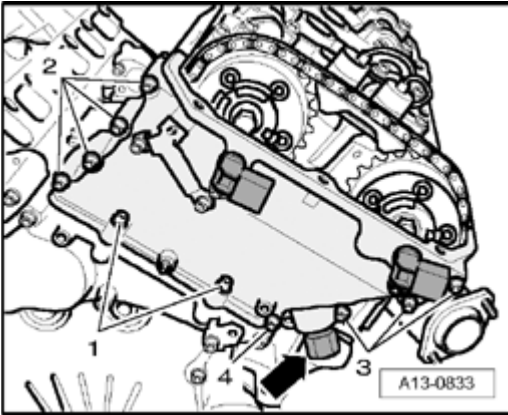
Camshaft Timing Chain Tensioner & Bolts
